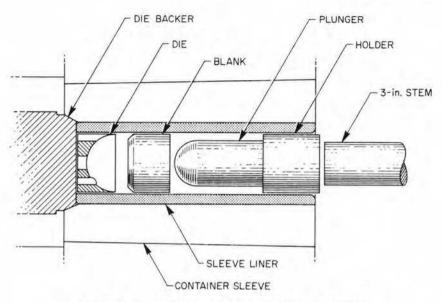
Tooling used in capsule fabrication by back extrusion.
